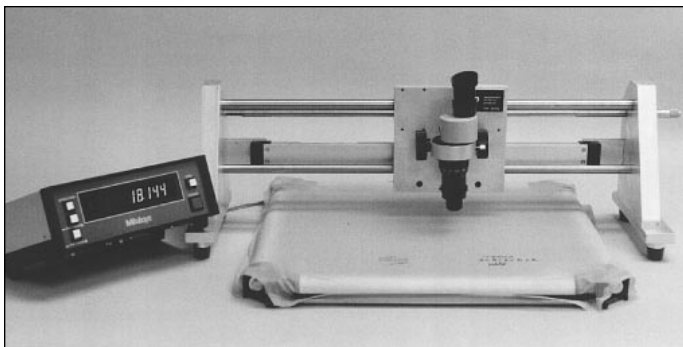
Digital Linear Gauge being used to measure thread diameter and mesh opening size.
